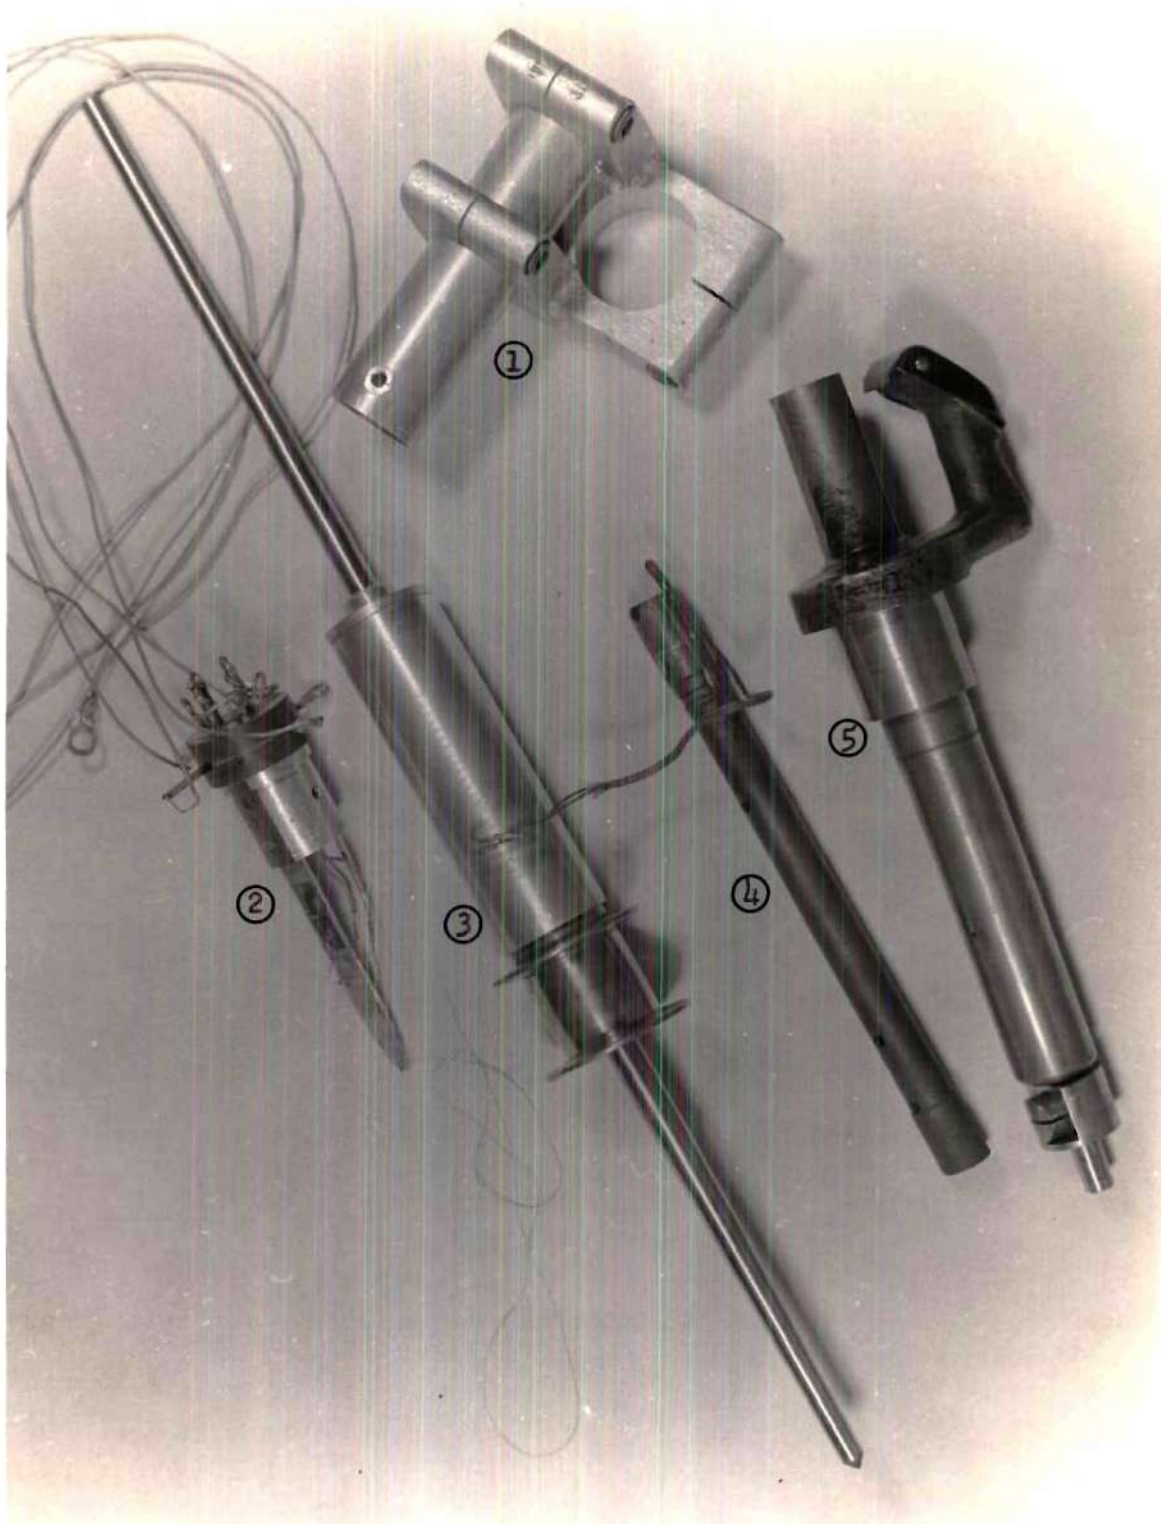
Spindle Dynamometer - Component Parts of Spindle and Friction Measuring Device
